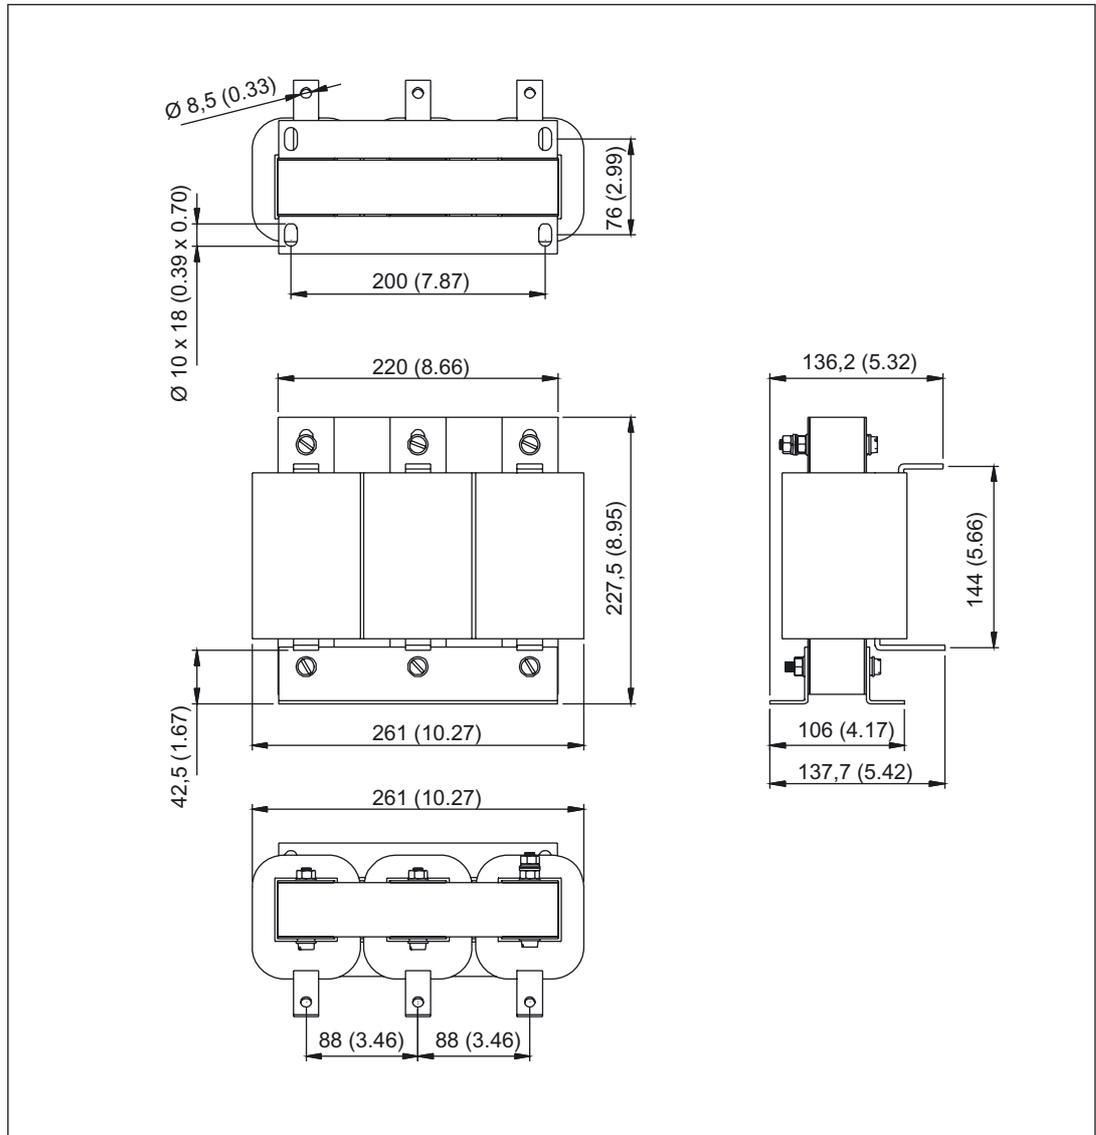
Dimension drawing of line reactor for Basic Line Module 100 kW, all dimensions in mm and (inches)
